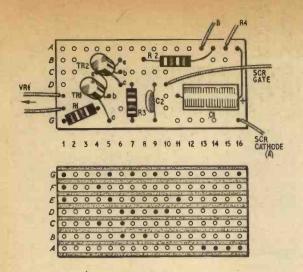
Component layout on the printed wiring board with wires for connection at points A and B (see Fig. 1). Resistor R4 is connected between hole 16A and the anode of SCR1
